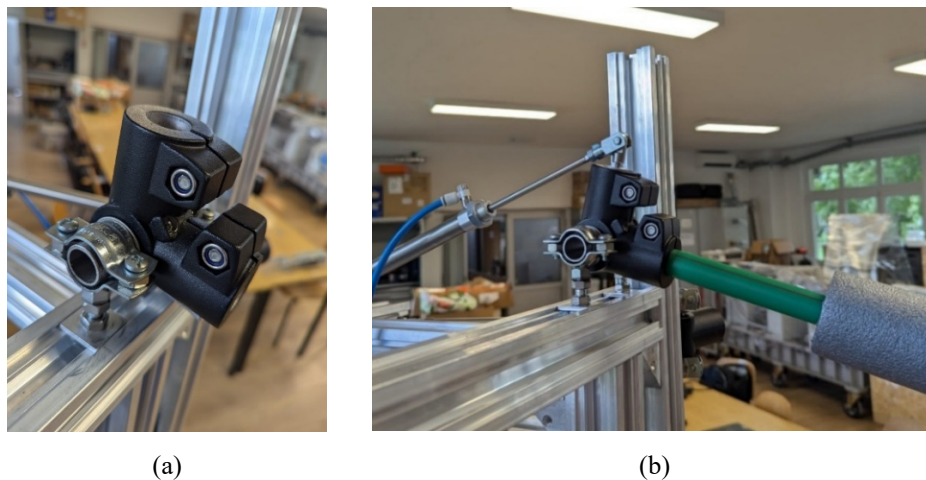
Mounting Components onto the Device Frame, a) Joint Connection to the Frame, b) Connection Between Pneumatic Cylinder and Focus Pad
